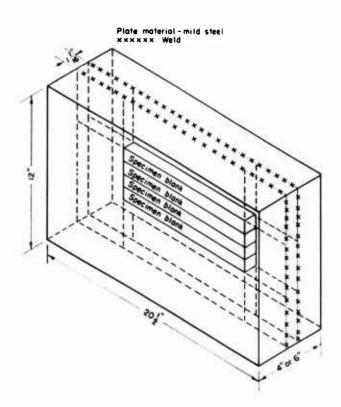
Assembly for heat treating specimen blanks within 4- and 6-inch-thick steel plates.
